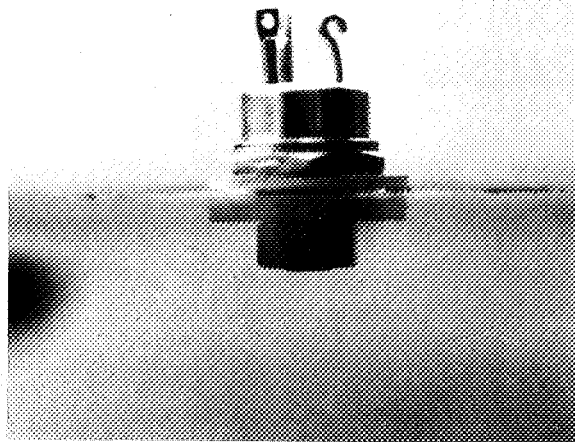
Mounting of 2N1724 transistor on anodized aluminum heat sink, using two BeO washers.
